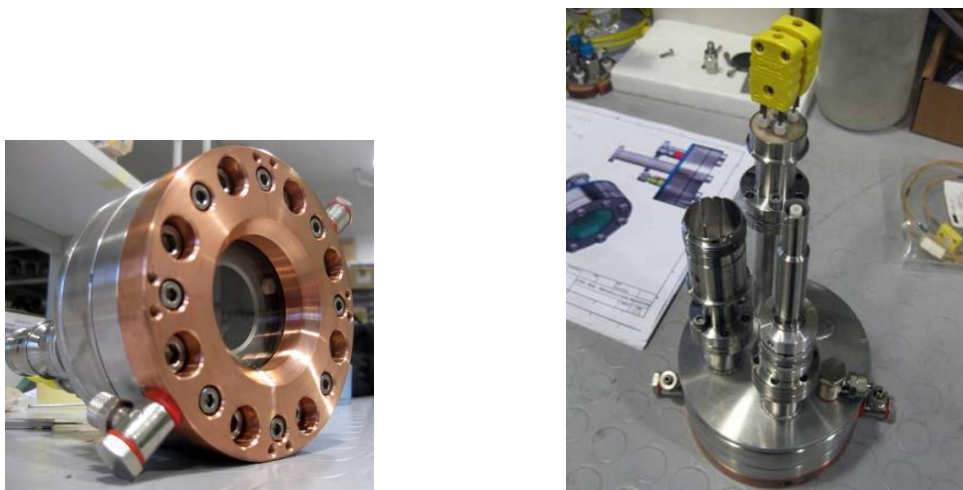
Front (left) and rear (right) view of assembled encapsulated Conversion Module
